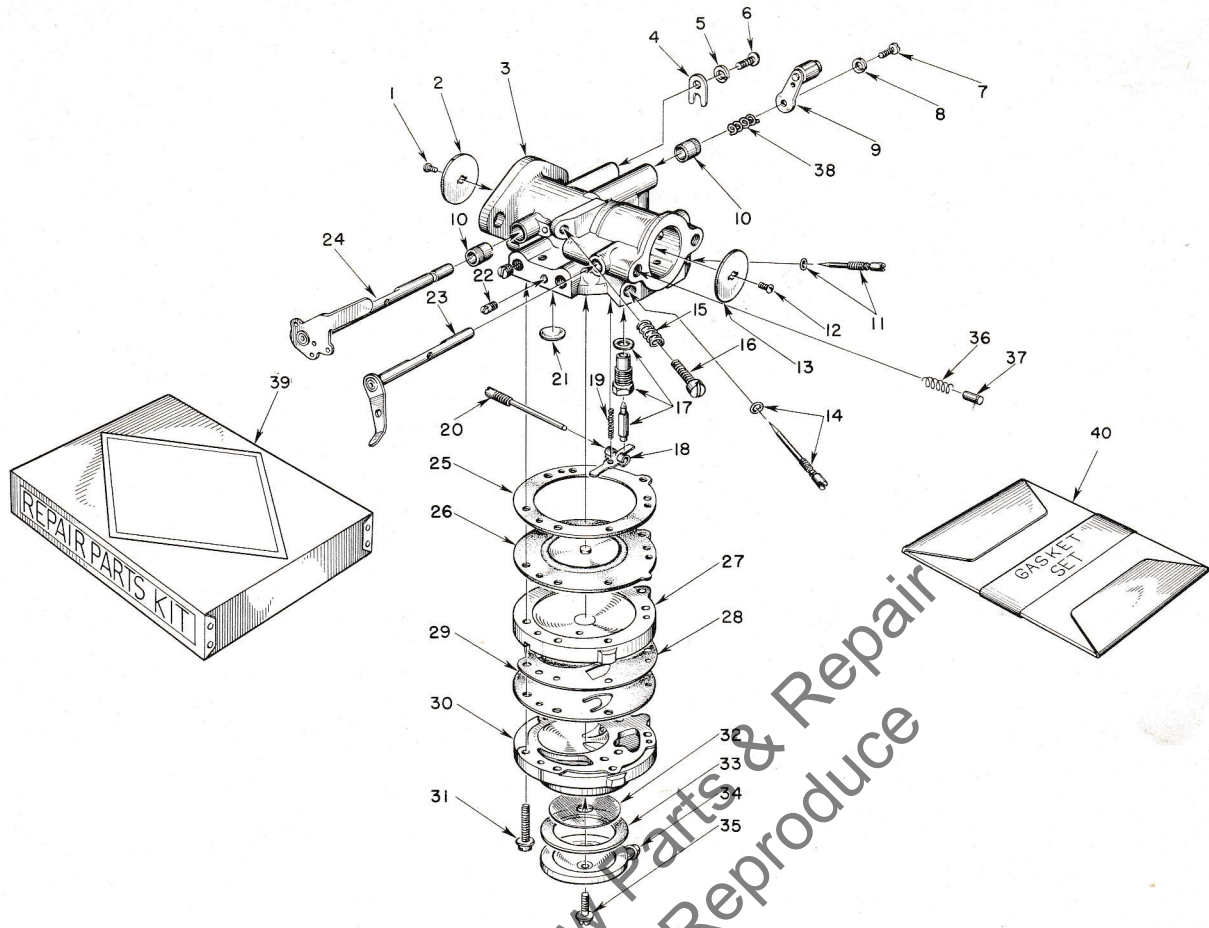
TILLOTSON HL-27B CARBURETOR PARTS
